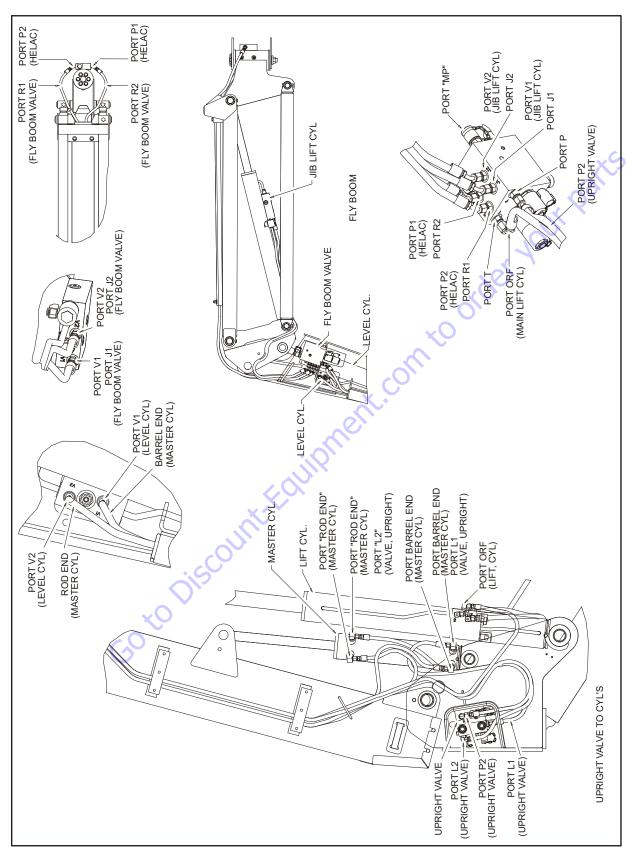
Boom Hydraulic Lines - Sheet 2 of 2
